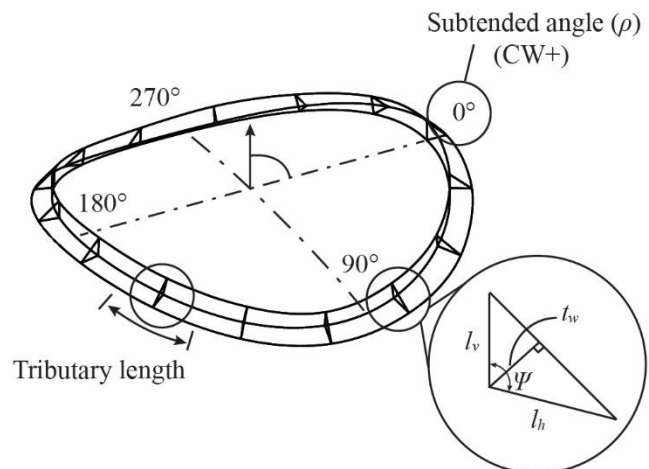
3D Solidworks model of weld profile and weld dimensions.
